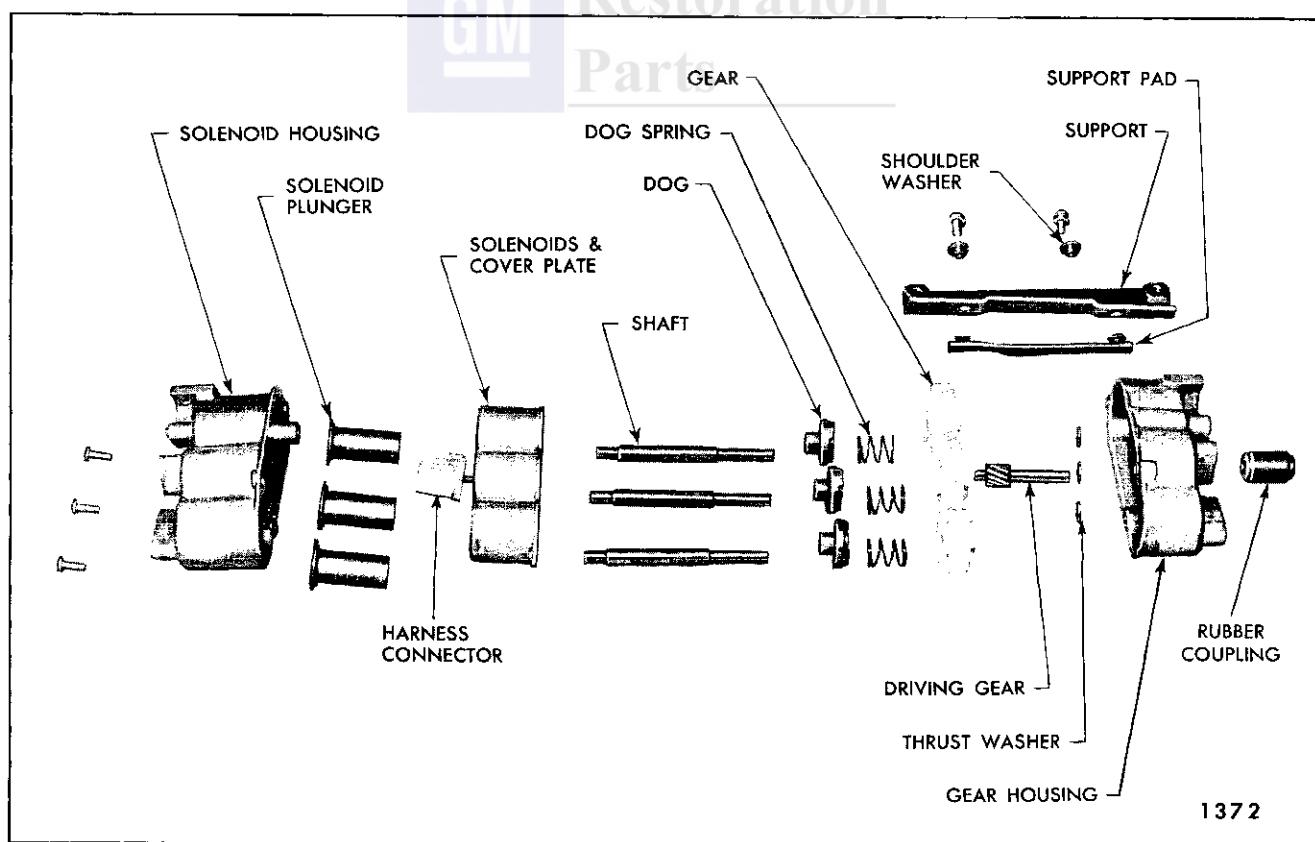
Six-Way Seat Adjuster Transmission - "B & C" Styles
